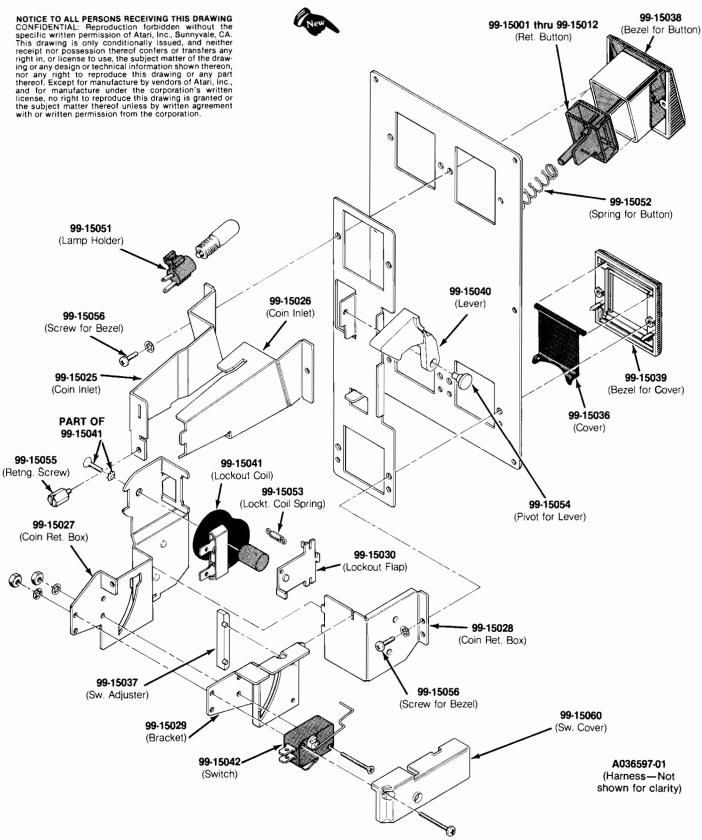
Double Coin Acceptor/Mount Assembly A036693-xx A
